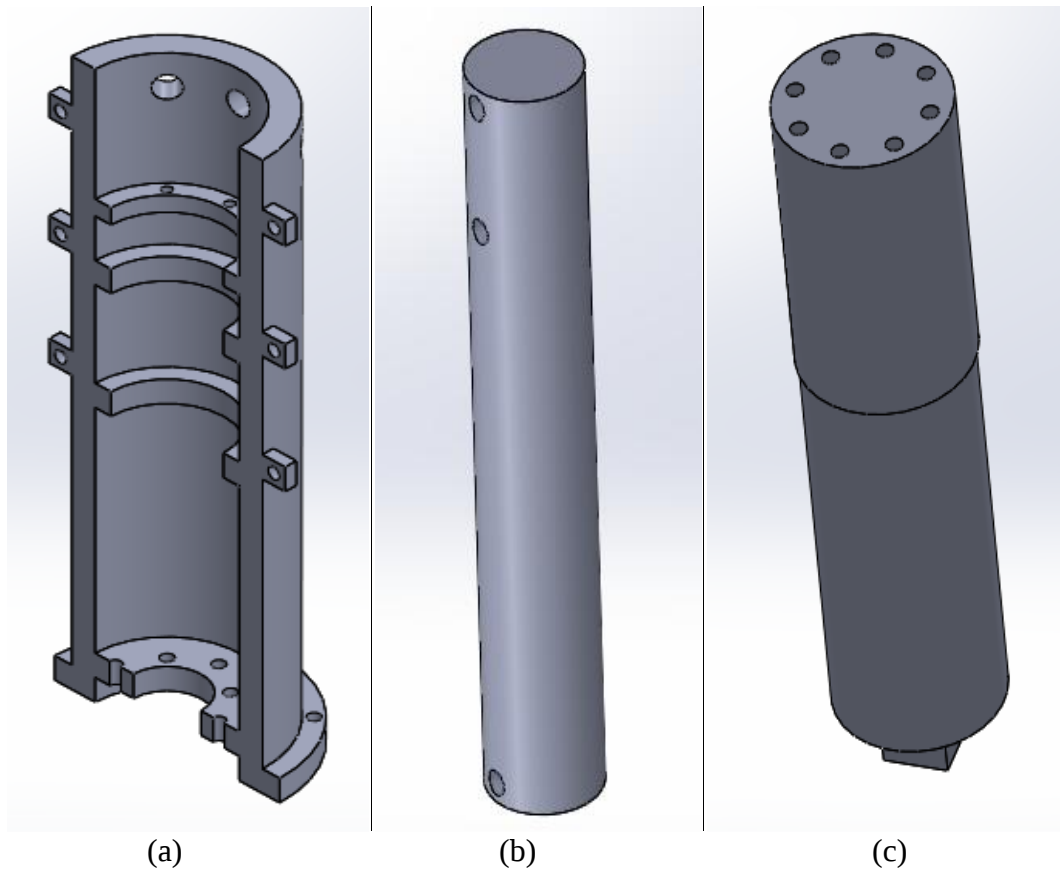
(a) Link mounting (b) Stationary shaft (c) Motor
